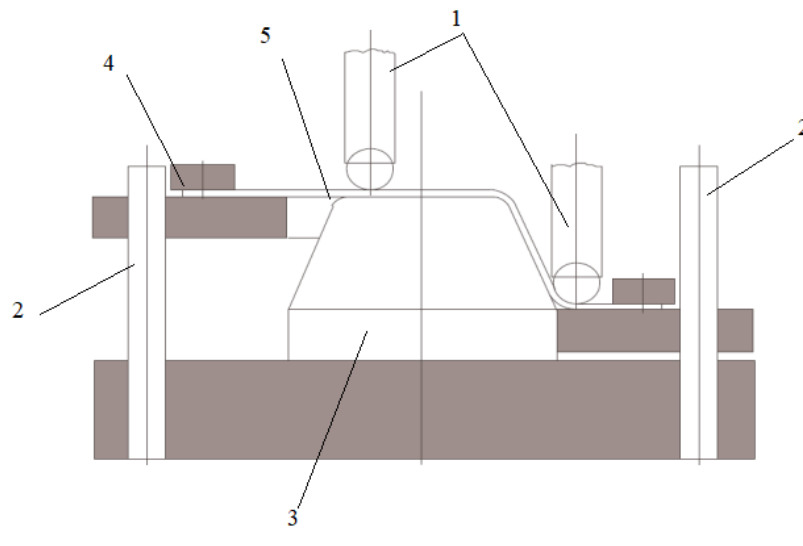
Incremental forming on both sides using a support tool (model), [11]: 1 – forming tool; 2 – supports for supporting the device for holding the semi-finished product; 3 – support tool; 4 – fixing device; 5 – semi-finished product
